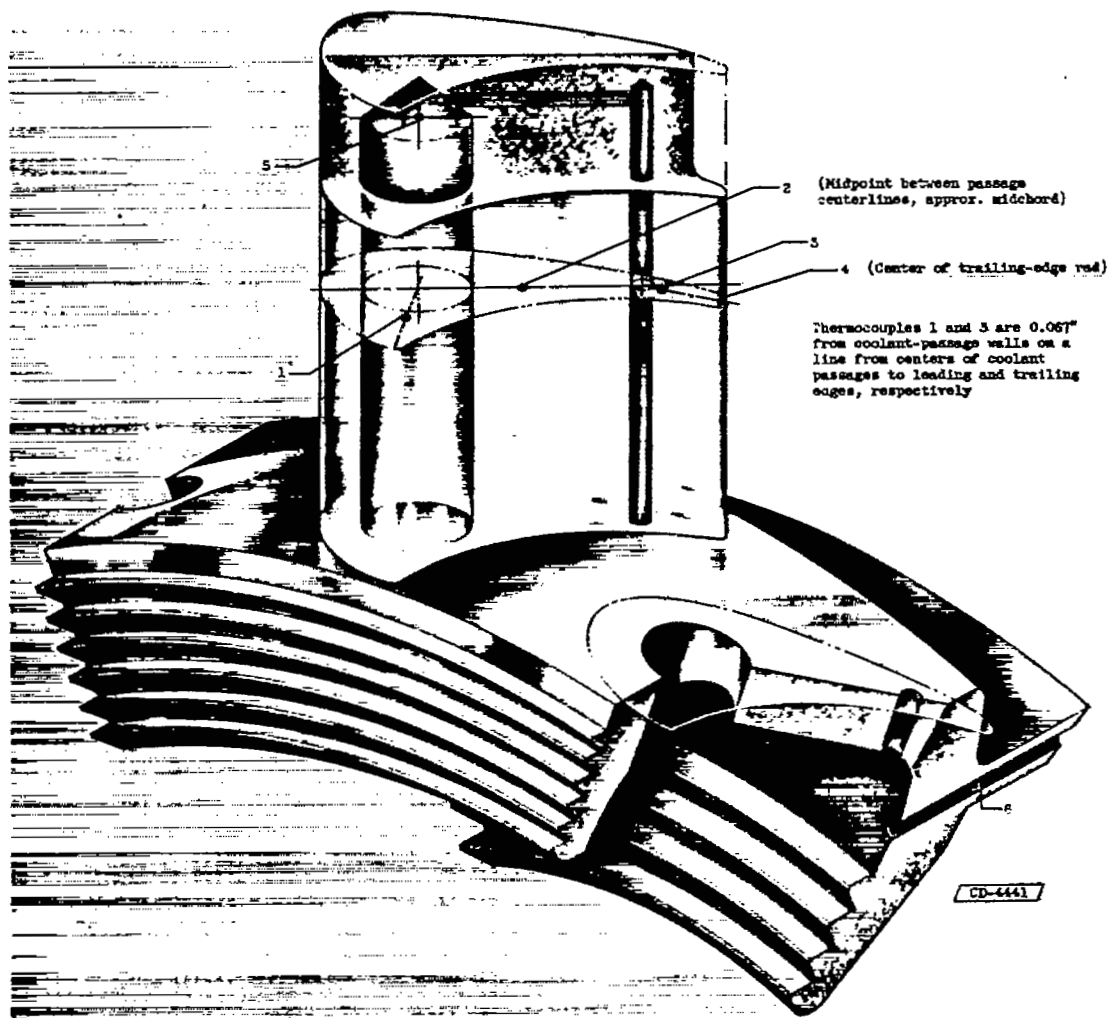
Diagrammatic representation of rotor blade thermocouple locations on loop-circuit liquid-cooled stainless-steel turbine.
